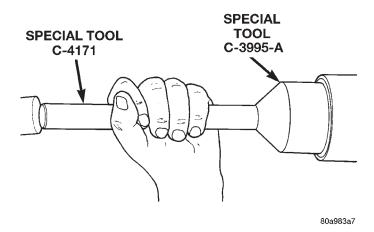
Extension Housing Seal Installation EXTENSION HOUSING
